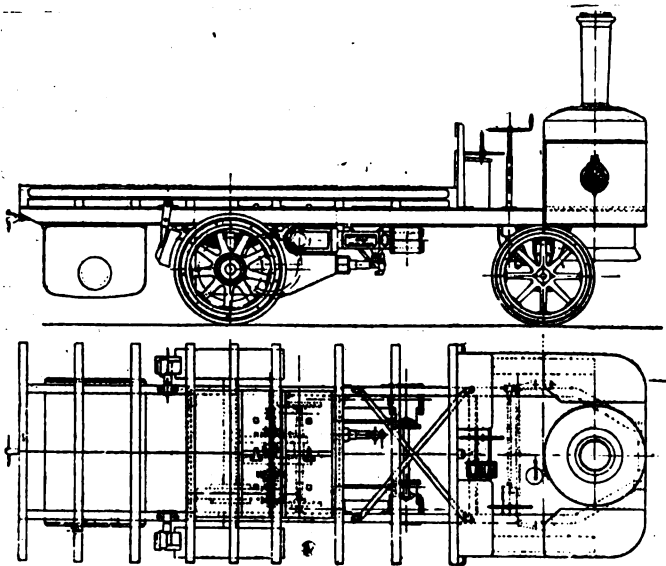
Elevation and Plan of Robey Steam Wagon.
